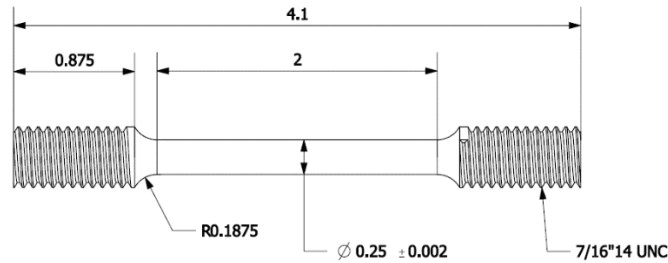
Cylindrical tensile specimen. Dimensions in inch.
